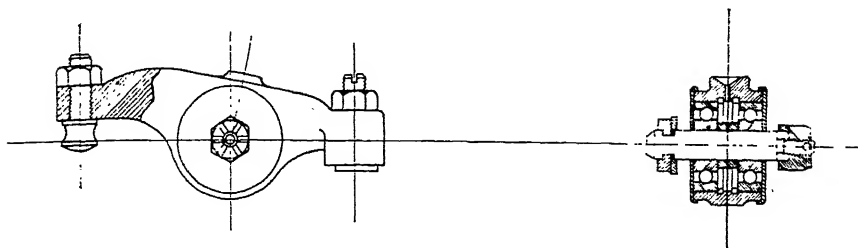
DETAIL OF VALVE-ROCKER ASSEMBLY
